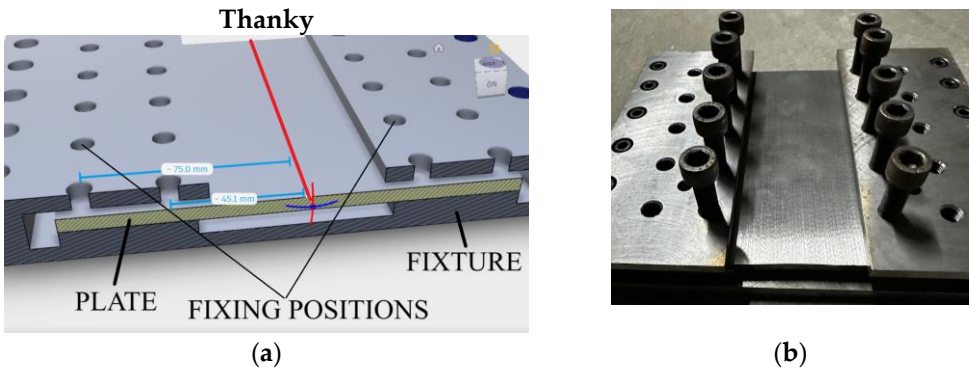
Fixture design (a) and clamping (SF: short fixing, LF: long fixing) positions (b).
